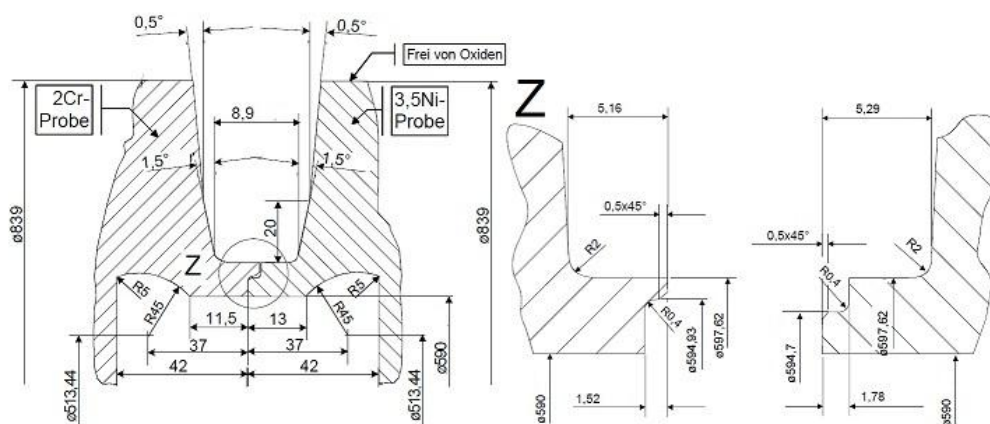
Welding seam preparation [Schreiber 2008, p.18]
